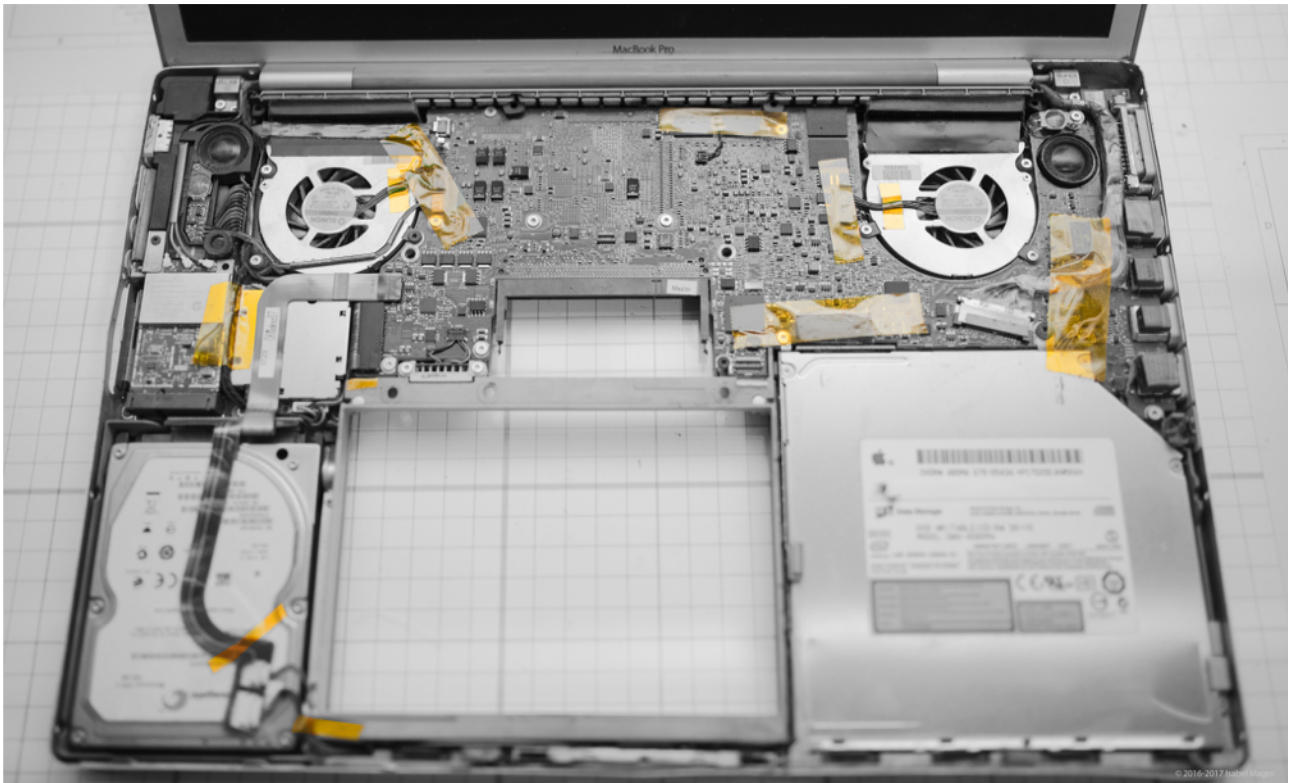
The first view into a disassembled MacBook Pro shows pieces of Kapton tapes.
